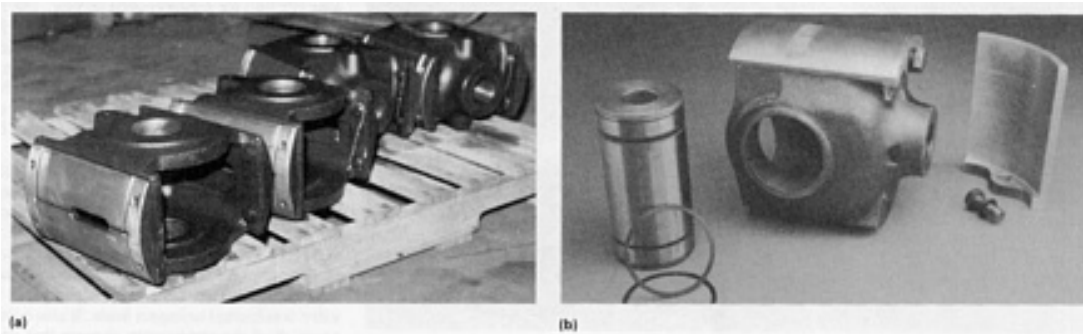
(a) Crossheads. (b) Crosshead with pin and shoes. Courtesy of Dresser-Rand
